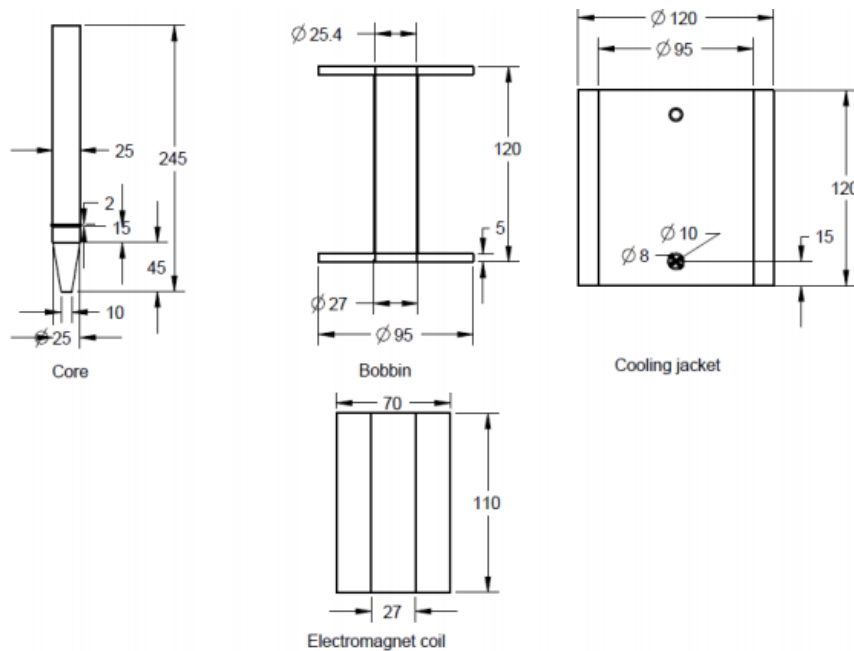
Drawing of the tool showing different parts and their dimensions
